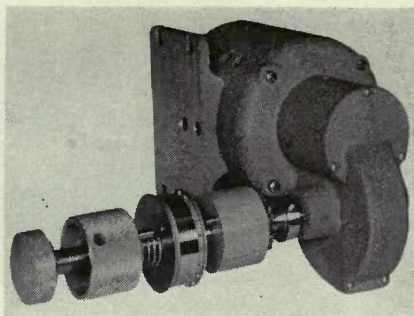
Free-wheeling sprocket and drive-motor assembly.
